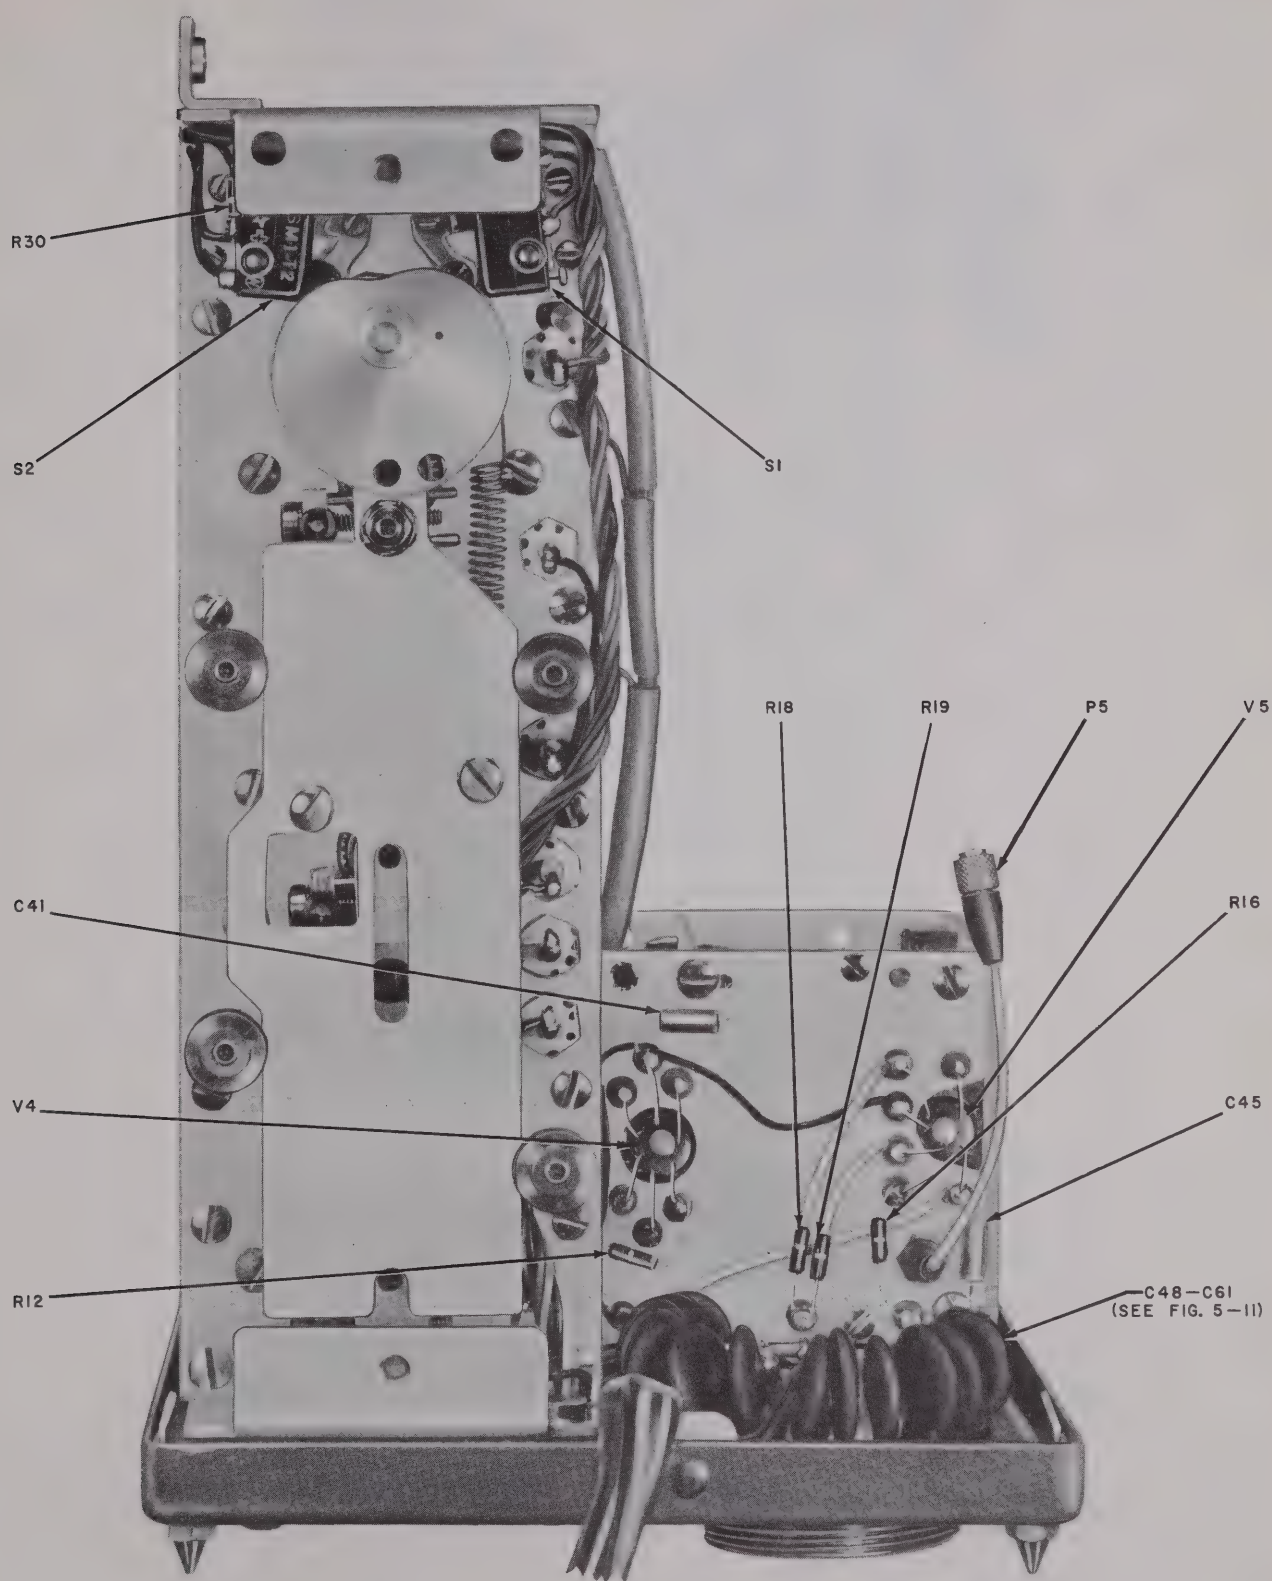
R-34A Receiver, R-f/I-f Assembly, Bottom View
